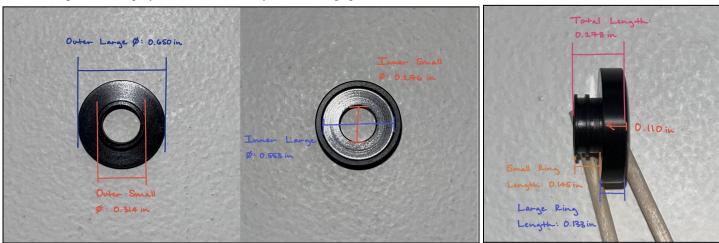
Dimensions of the back (left) and front (middle) profiles of the mounting base. Side profile (right) of the mounting base and dimensions.
